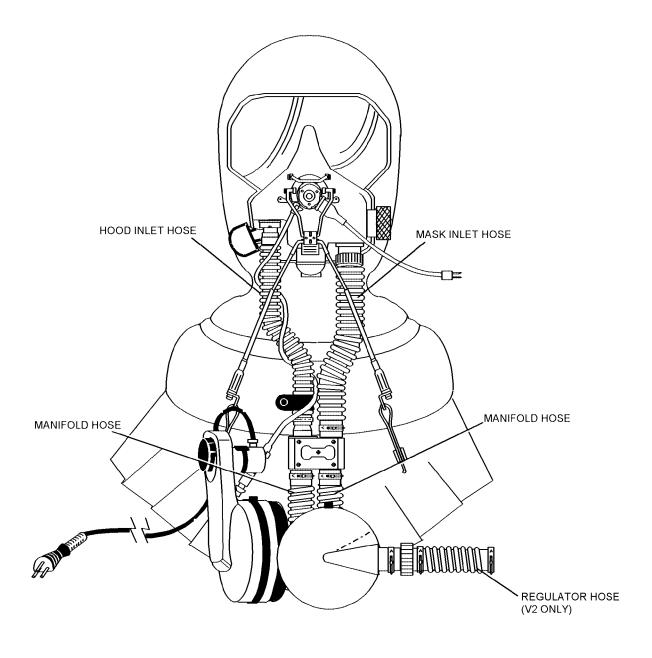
Respirator Assembly ((V)2 Variant Shown)
